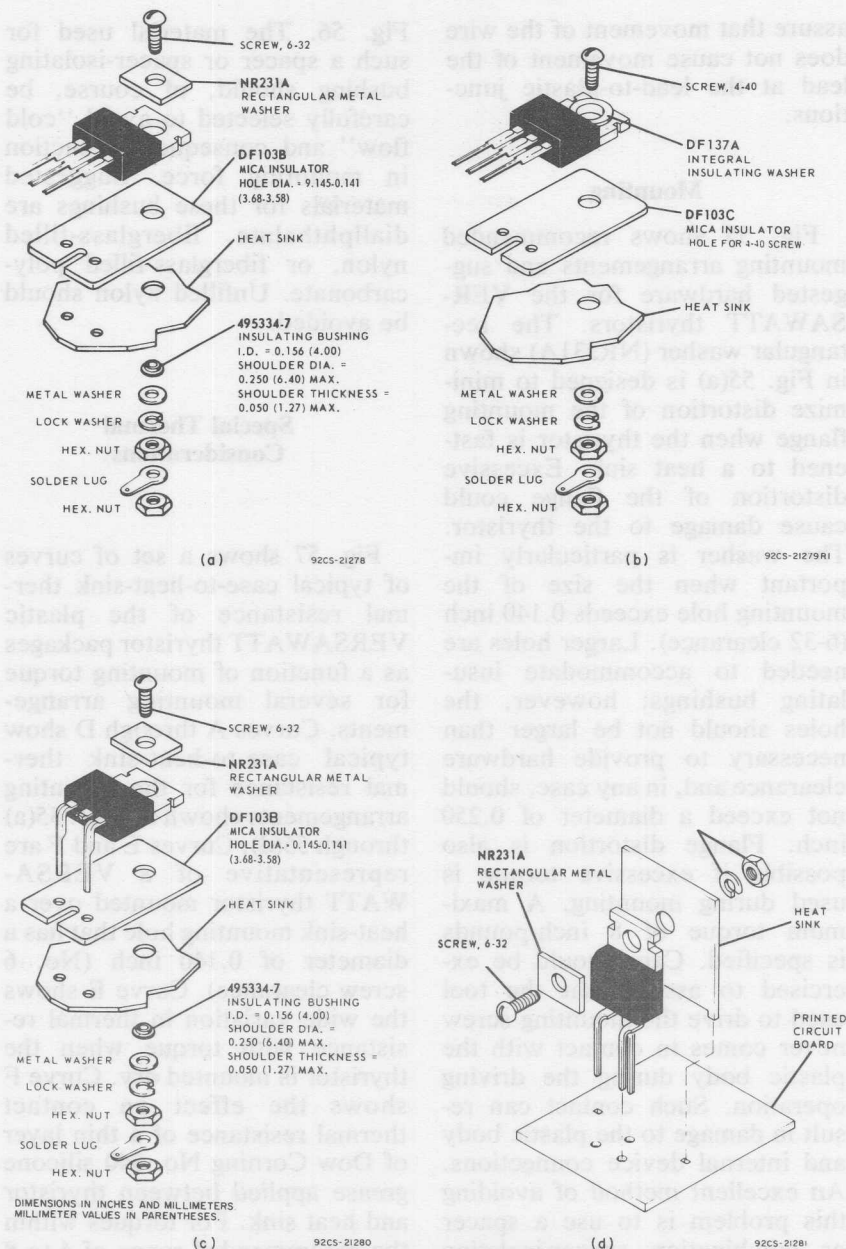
Mounting arrangements for VERSAWATT thyristor packages: (a) and (b) in-line-lead mounting; (c) chassis mounting; (d) formed-lead vertical mounting on printed-circuit boards.
